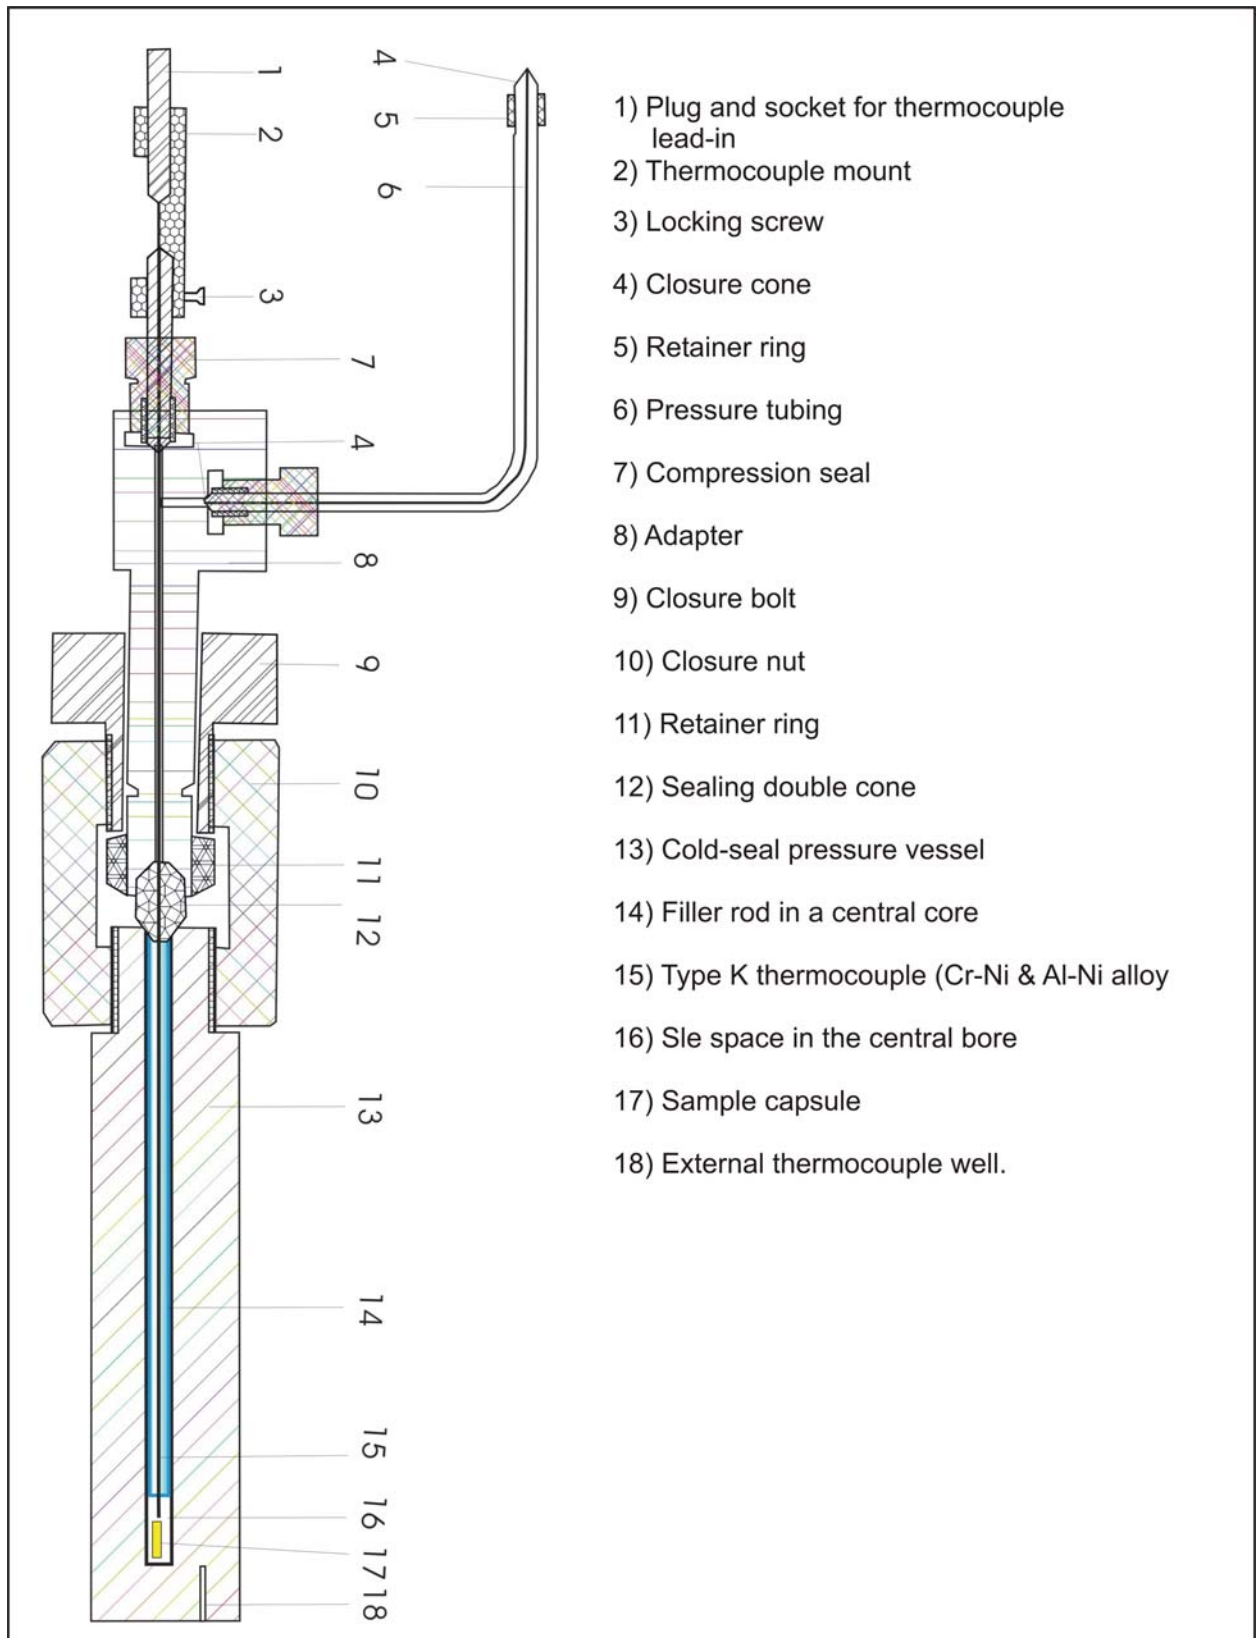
Cross-section of a cold-seal vessel and closure assembly (Autoclave) Note that the thermocouple is installed and assembled inside the vessel and its end point lies just close to the sample charge, No. 17.
